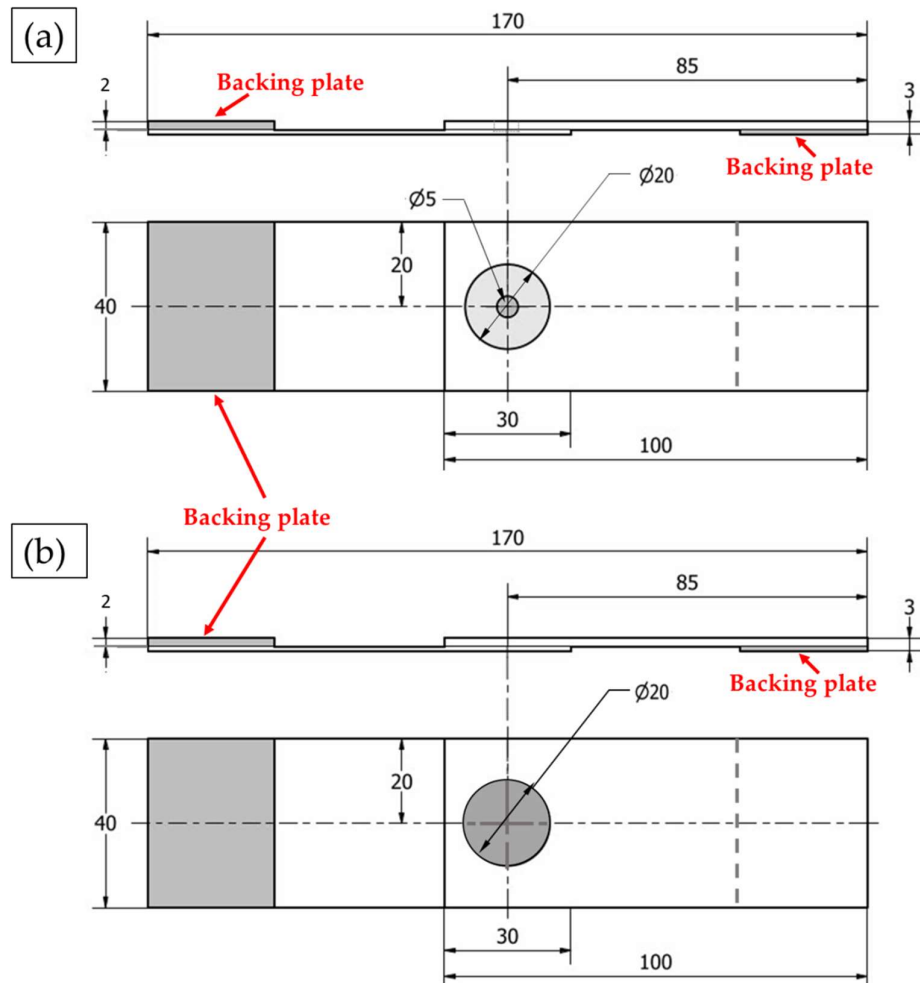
Schematic of tensile-shear test specimens: (a) the FSSWed AA6082-T6 dissimilar sheet thickness joint and (b) the RFSSWed joint (all dimensions in mm).
